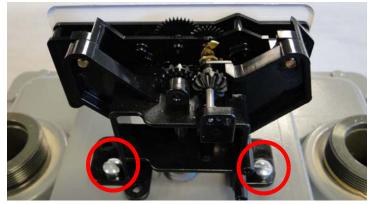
5. Rear View of Supported Index Mounting Bracket Assembly
